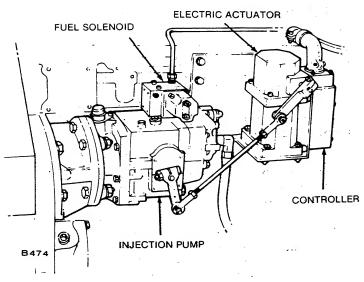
FUEL SOLENOID VALVE LOCATION
